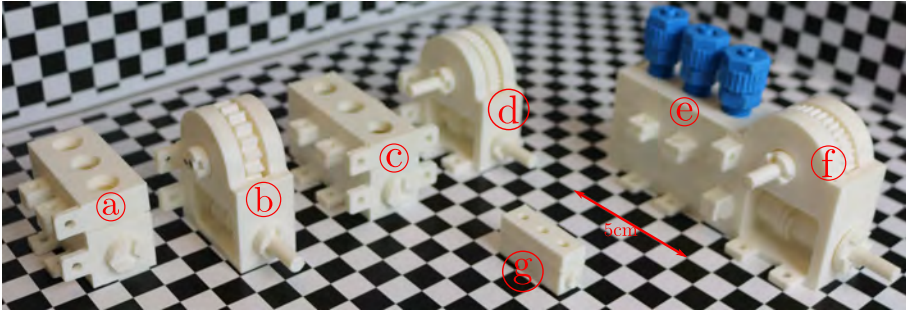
3D printed proof-of-concept prototypes, generated from a single parametric Computer Aided Design (CAD) file with different dimensions. *a* Motor with dimension $30 \times 20 \times 46 \text{ mm}^3$. *b* Gearhead compatible with *a* with a ratio of 1 : 20. *c* Motor with dimensions $30 \times 20 \times 55 \text{ mm}^3$ *d* Gear-head compatible with *c* with a ratio of 1 : 40 *e* Motor with dimensions $40 \times 25 \times 40 \text{ mm}^3$ *f* Gearhead compatible with *e* with a ratio of 1 : 40 . *g* Motor with dimensions of $10 \times 15 \times 28 \text{ mm}^3$, with a total volume of 4.6 cm^3 . This was the most compact bi-directional rotational Pneumatic Stepper Motor (PSM) at the time.
